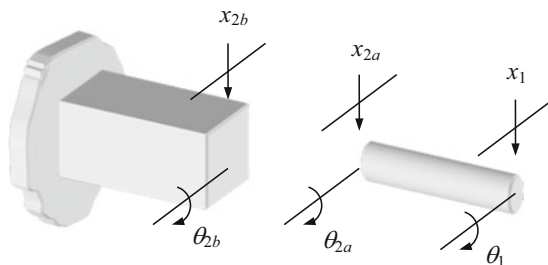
Solid cylinder and prismatic beam components used to form cantilevered assembly
